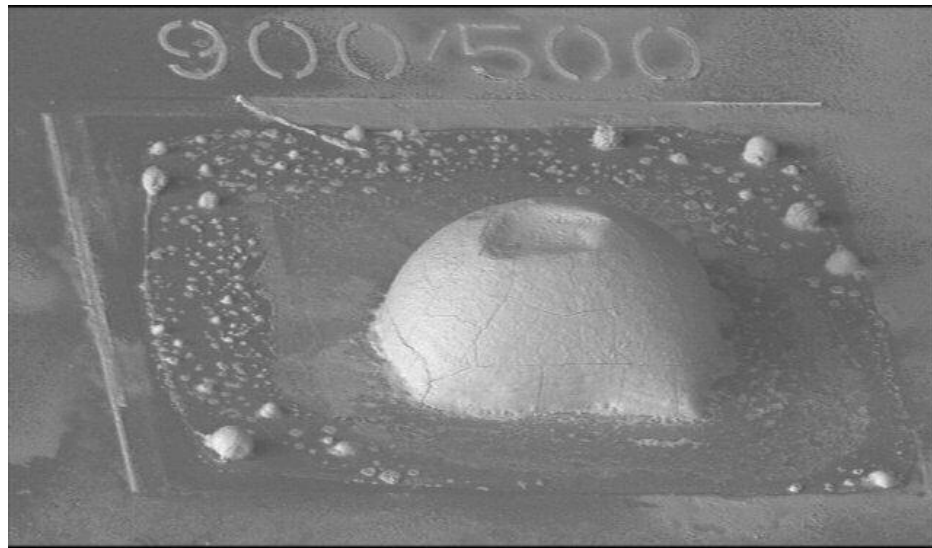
Categories post reflow shapes of open faced solder joints
